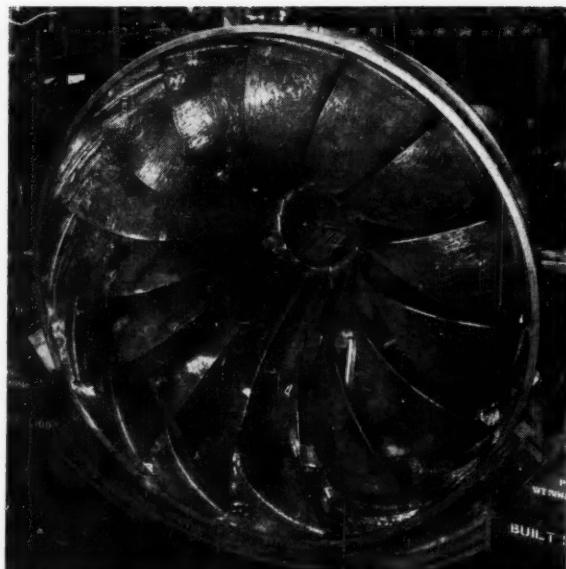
Typical example of assembly by welding is this large Francis runner
